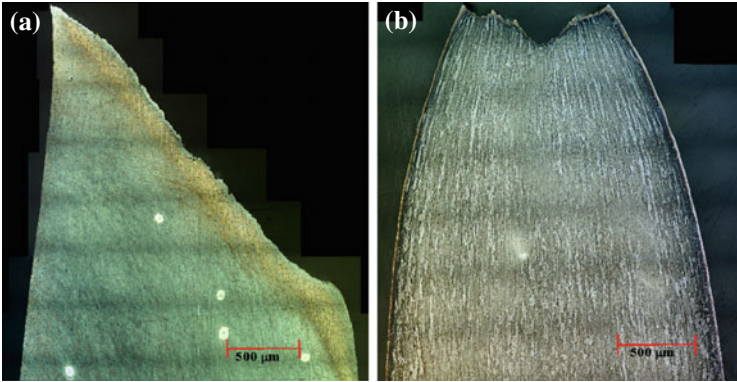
Thickness section of the fractured specimens indicating slant fracture in Al 6061-T6 (a) and flat fracture Al 6061-O (b). Notice the significant thickness reduction in the right figure indicative of the large strains encountered in the Al 6061-O
